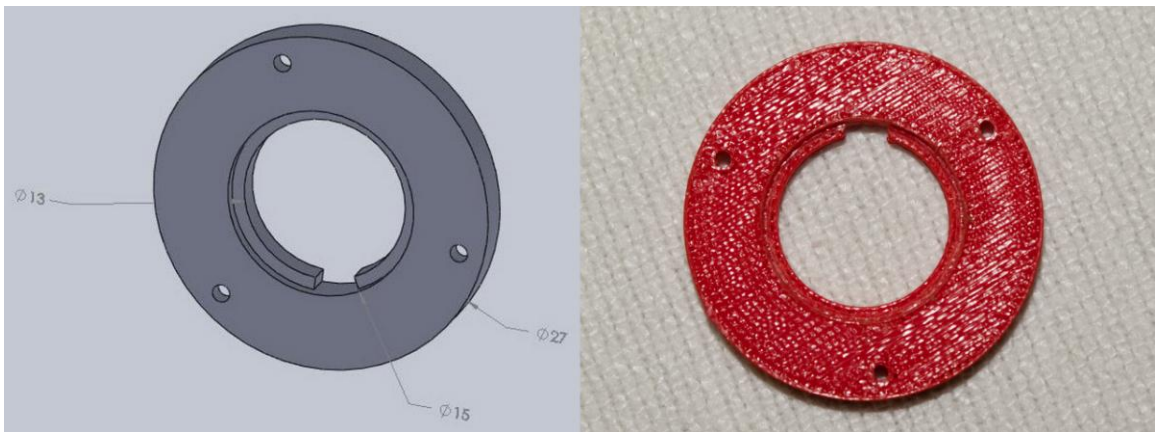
Actuator holder with electrodes. (Left) Inner actuator holder; (Right) Outer actuator electrode
